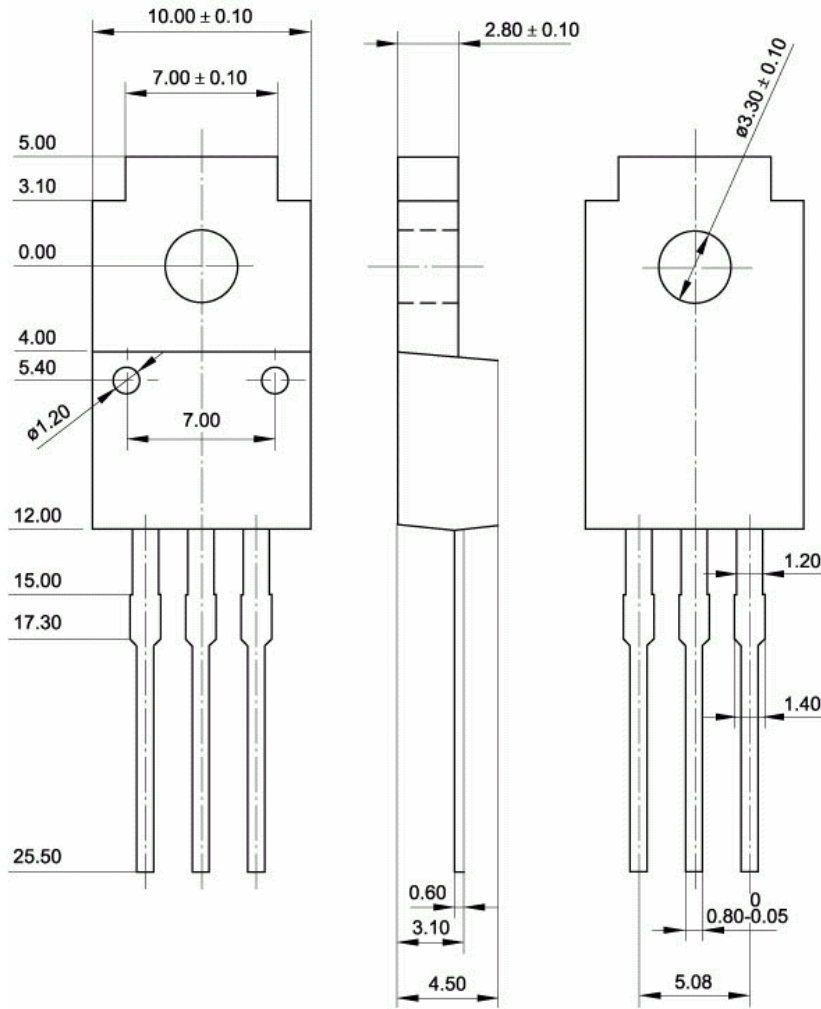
Outline dimensions (unindicated tolerance: ± 0.15 mm)
